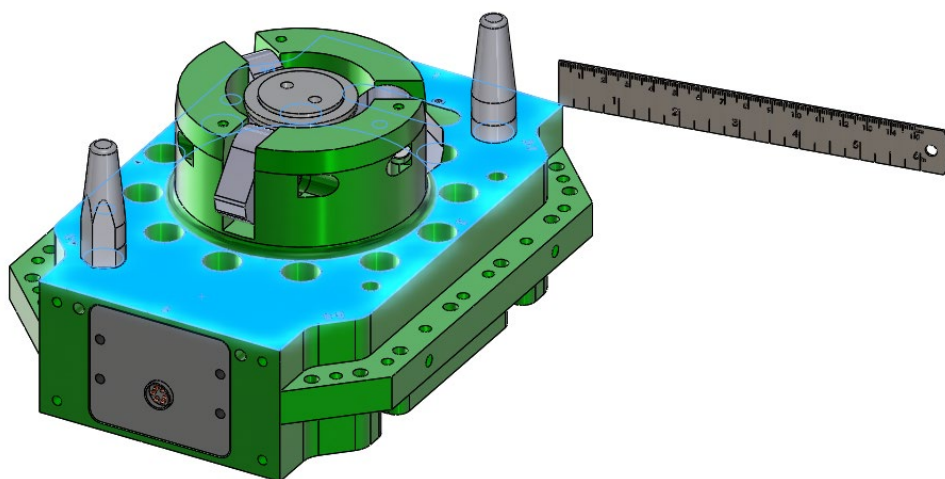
Robot Side – Raised Material Inspection
